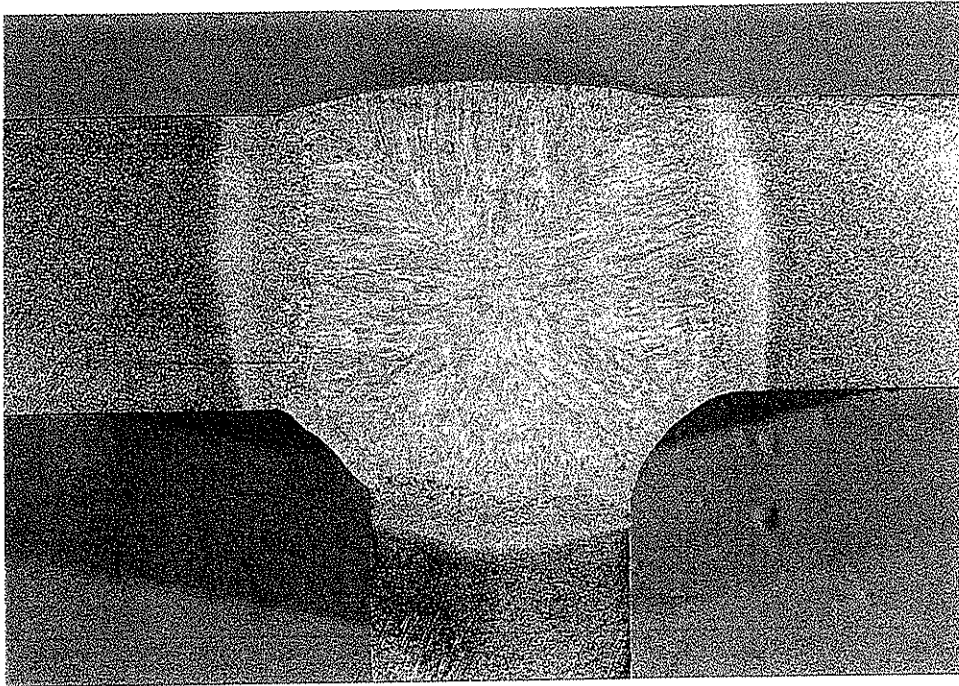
Etched cross-section of electrogas weld. [6/94/20-6]
